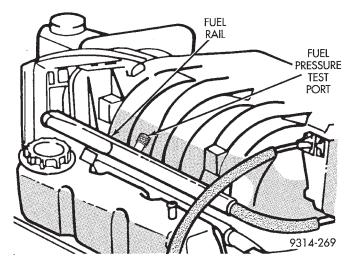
Fuel Pressure Test Port—3.3L Engine
